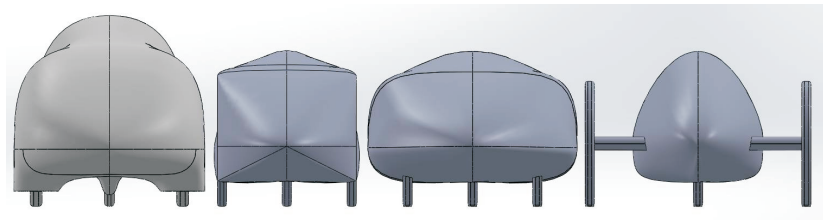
Car body shapes: a) Eco-Arrow; b) Prototype 1; c) Prototype 2; d) Prototype 3
